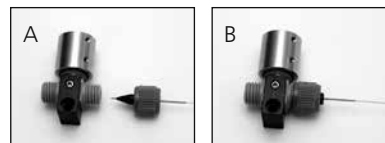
A: Assembling the nut, ferrule, sleeve and PicoTip; 11B Securing the PicoTip assembly into the MicroTee
